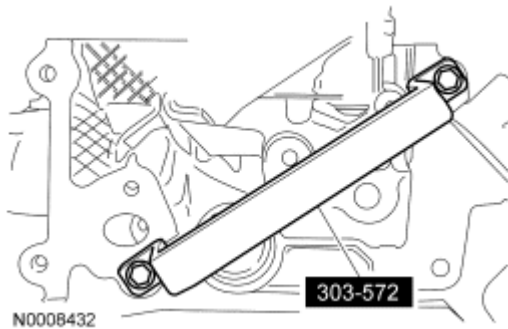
Identifying Special Tool (303-572) RH Cylinder Head
